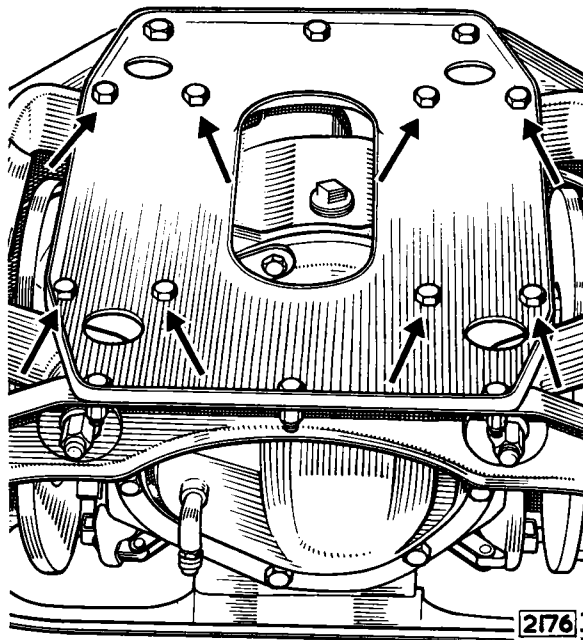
Showing the eight bolts which secure the tie plate to the inner fulcrum mounting bracket
